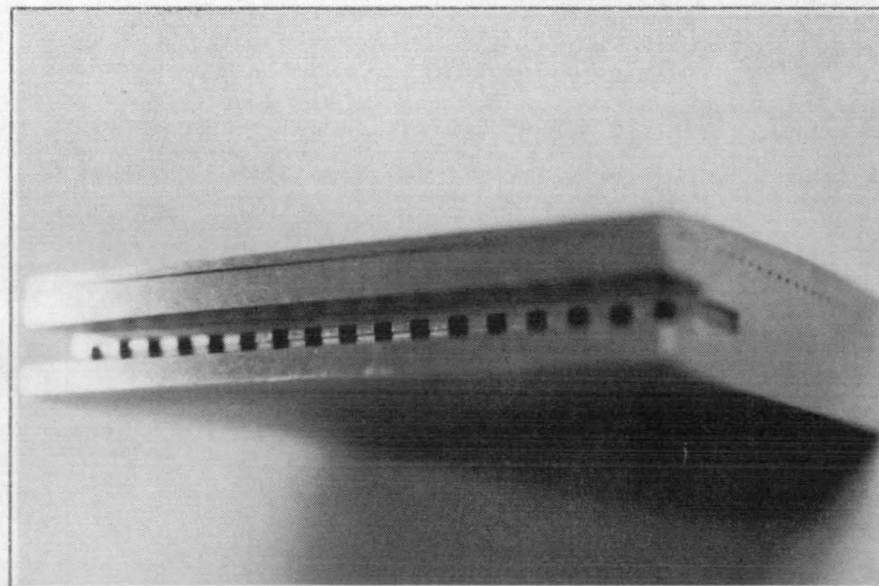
MG6 cut & shaped to form segment 3F, showing docking ports & cross channels
